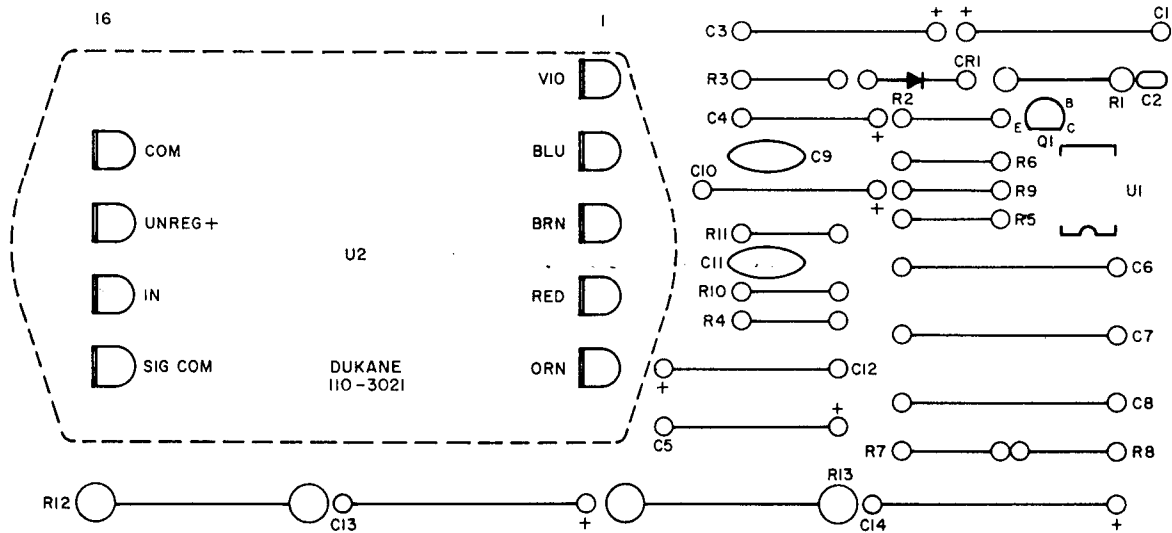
Parts Layout on 110-3021 Hybrid Amplifier Module
